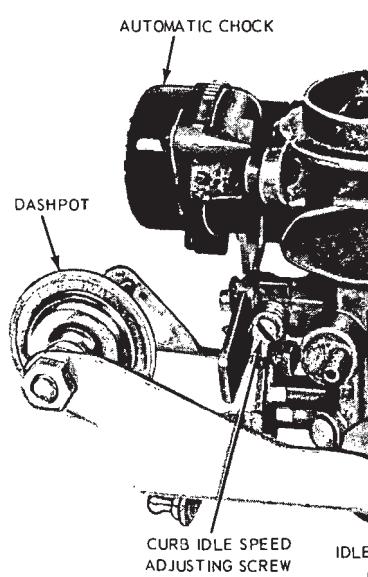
Carburetor Adjustments—Carter Model RBS 1-V
